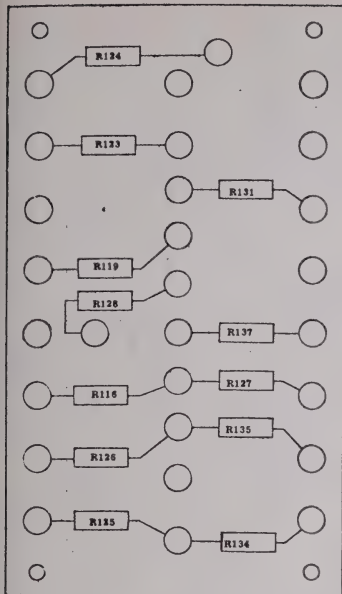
PARTS LAYOUT, MODEL 707AF.
